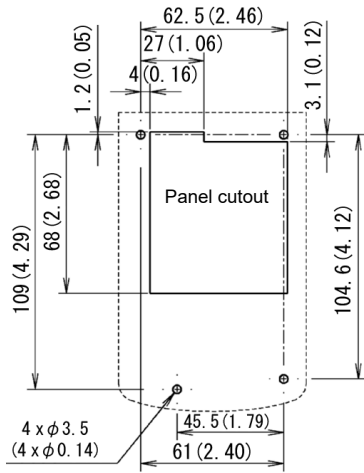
(a) Panel cutout size drawing (arrow A) when secured at 4 points
